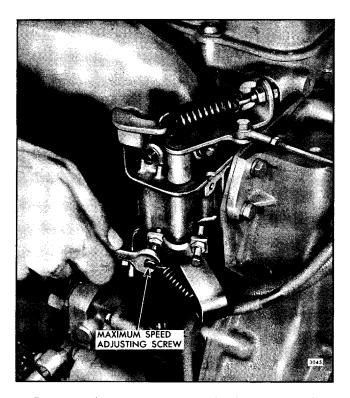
Adjusting Maximum No-Load Engine Speed
